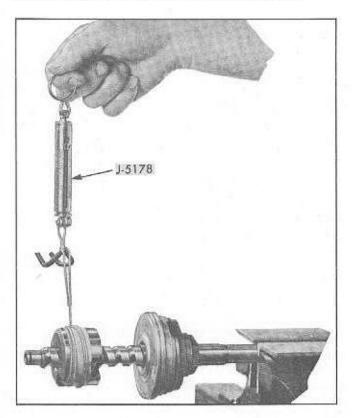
Measuring Preload of Ball Nut Using Tool J-5178
